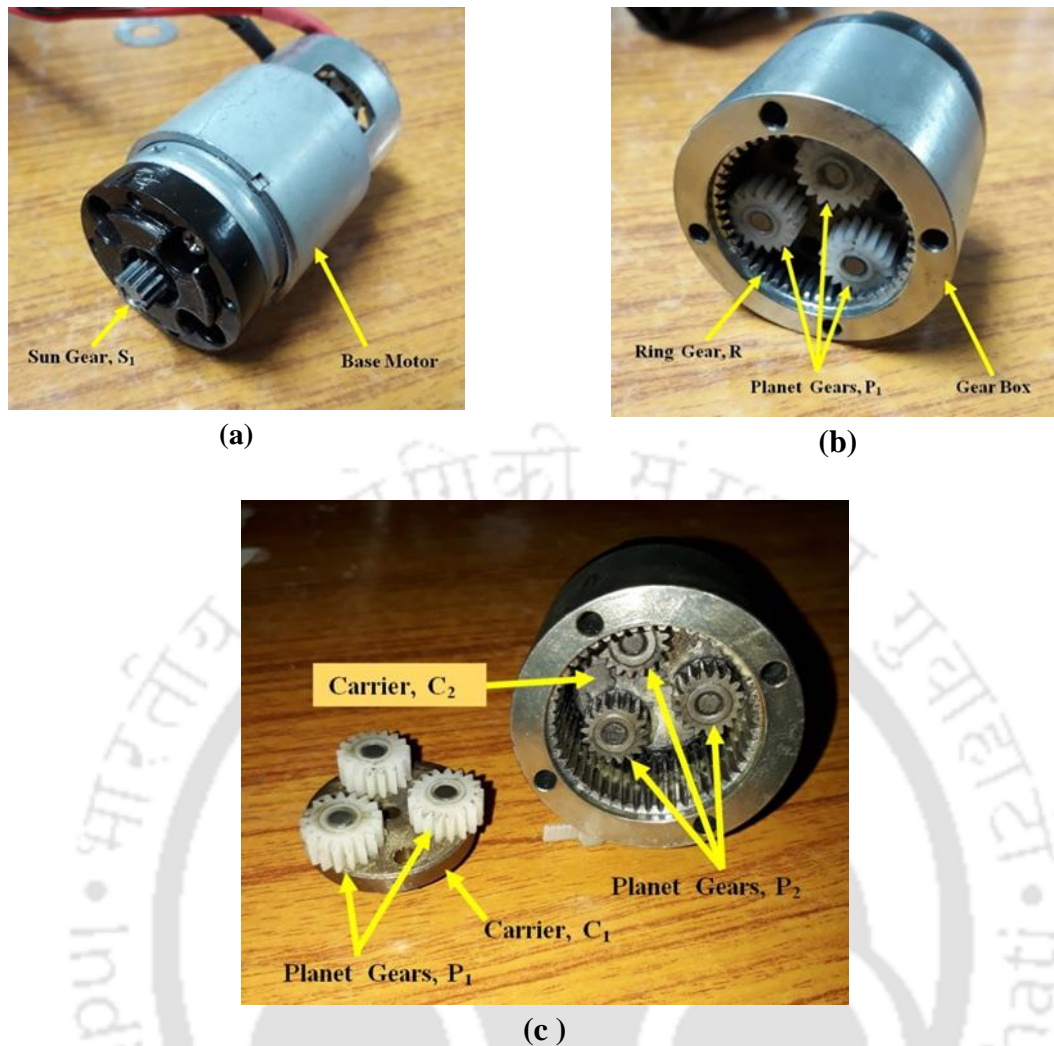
(a, b, c) Detail gear arrangement of the planetary gearbox
